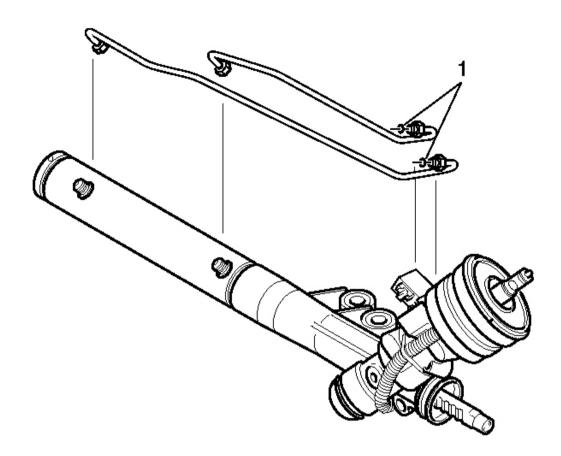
Valve End Of Line & O-Ring Seals Courtesy of GENERAL MOTORS CORP.
